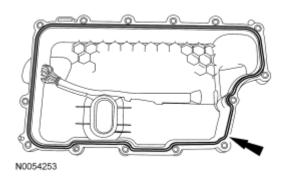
Inspecting Transaxle Main Control Cover Seal For Damage Courtesy of FORD MOTOR CO.
